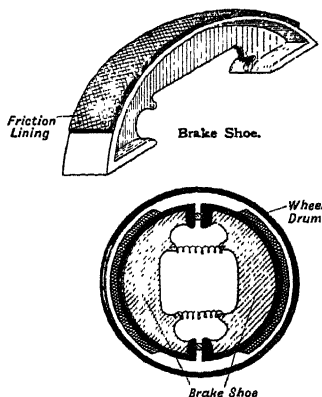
Motor-car brake. The two brake shoes, covered with the friction lining, are thrust apart by application of the brake, and are forced against the inside of the wheel drum, thus tending to stop its turning.
